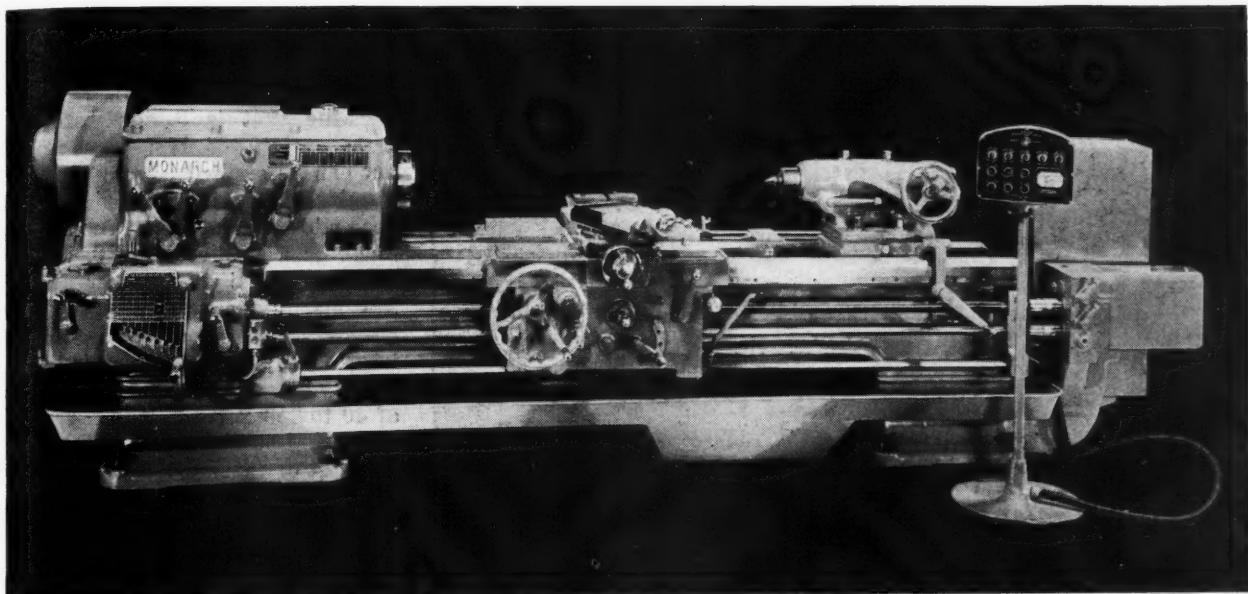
Monarch engine lathe equipped with new "Motor-Trace"
